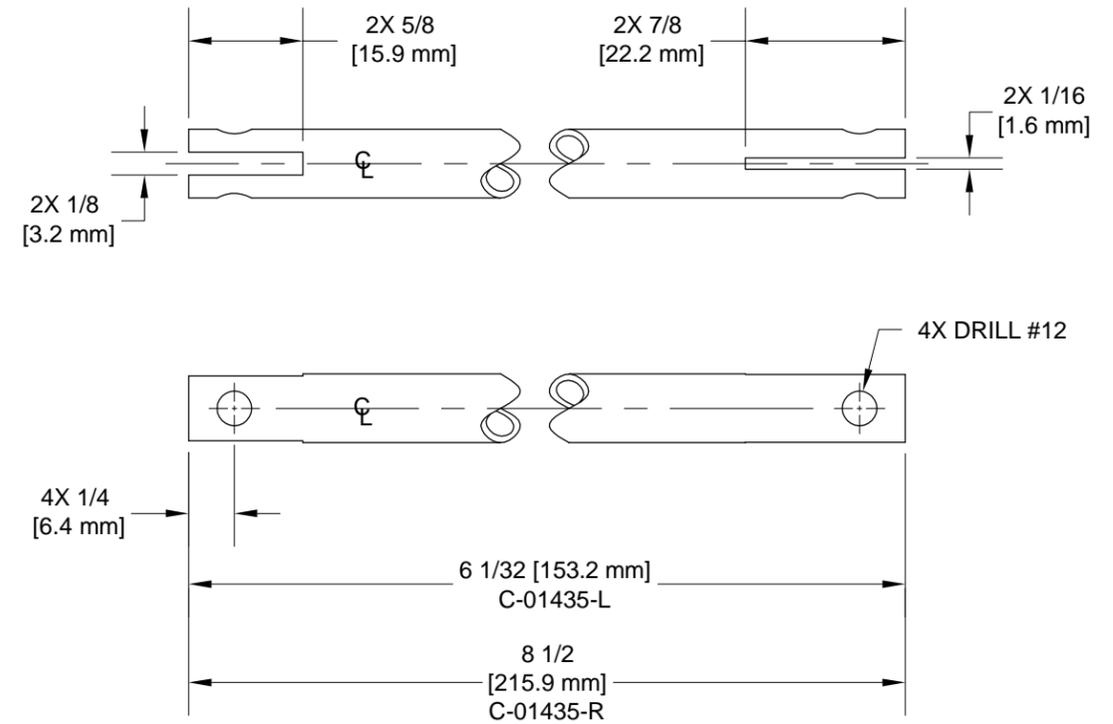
LEFT & RIGHT PUSHROD FABRICATION
